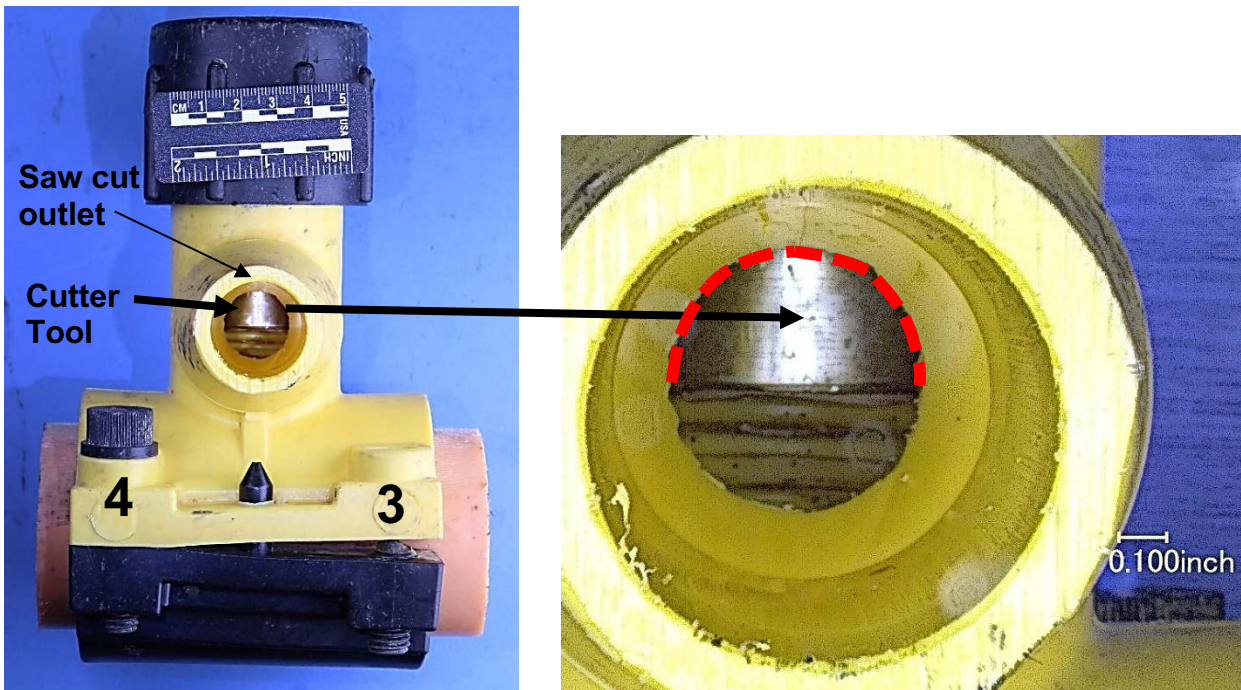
Photograph of a portion of the tapping tee assembly looking in the saw cut outlet showing the bottom end of the cutter tool that extended approximately half way down the outlet (left side of page). A close-up photograph of the same cutter tool (right side of page) shows the portion of the cutter tool that was exposed through to the outlet highlighted by the red dashed line.
